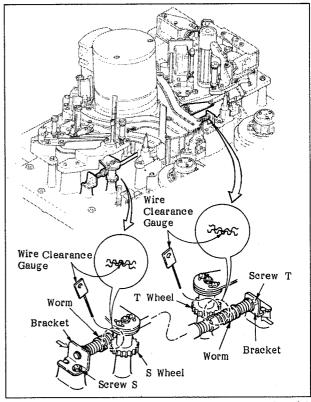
Adjustment of the Clearance between the Link Wheel and the Worm Gear
